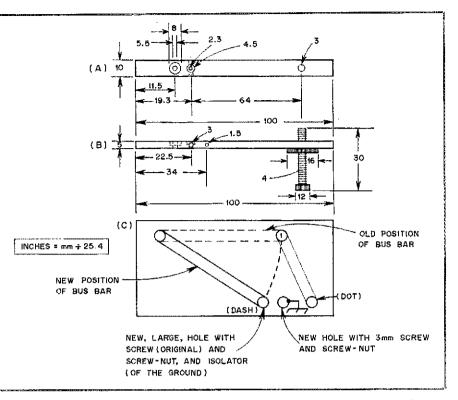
These simple modifications are for converting a Vibroplex-type key into a paddle for use with an electronic keyer. Dimensions for the new bar required for this modification are shown in A and B. On the bottom of the key the bus bar shown in heavy lines is moved to the position indicated. The output terminals are at the lower right in the drawing at C. Holes for the original terminals may have to be enlarged to accommodate insulating sleeves, which can be made from biastic tubing or other material. A new hole must be made for the ground connection.
